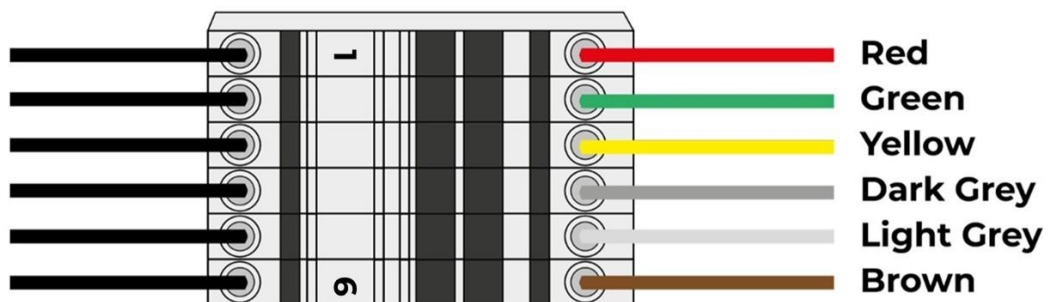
Terminal block for the 6-pin cable on the air probe connector
